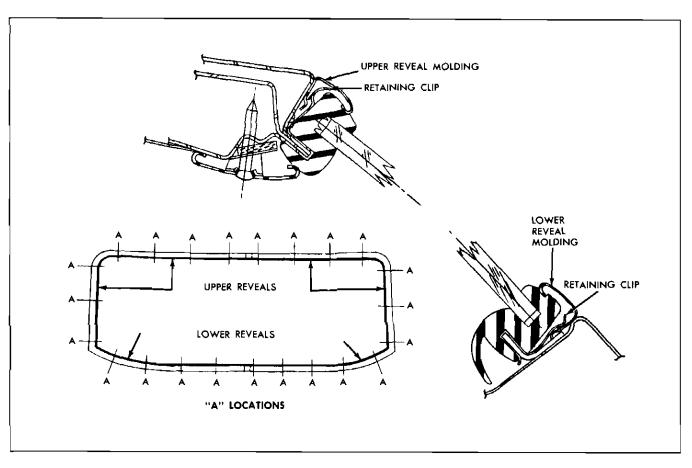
Back Window Reveal Moldings—37 Styles
